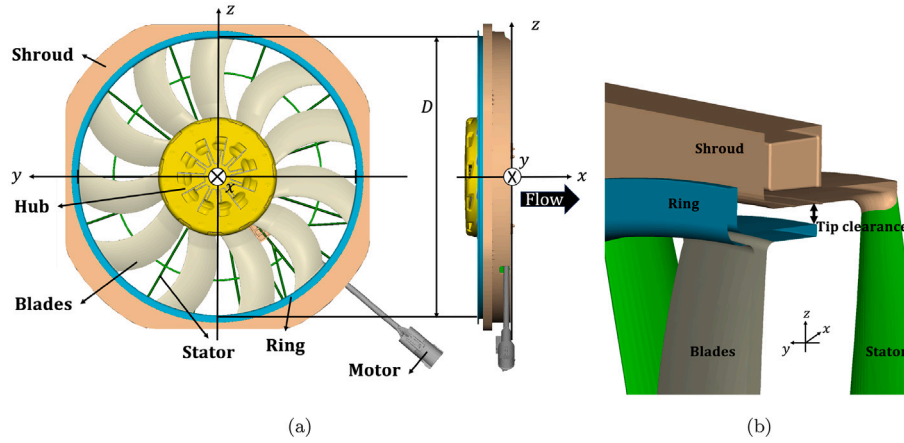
Tested automotive fan. The main parts of the fan module are shown with different colors. (a): Cooling fan. (b): Tip clearance detail.
